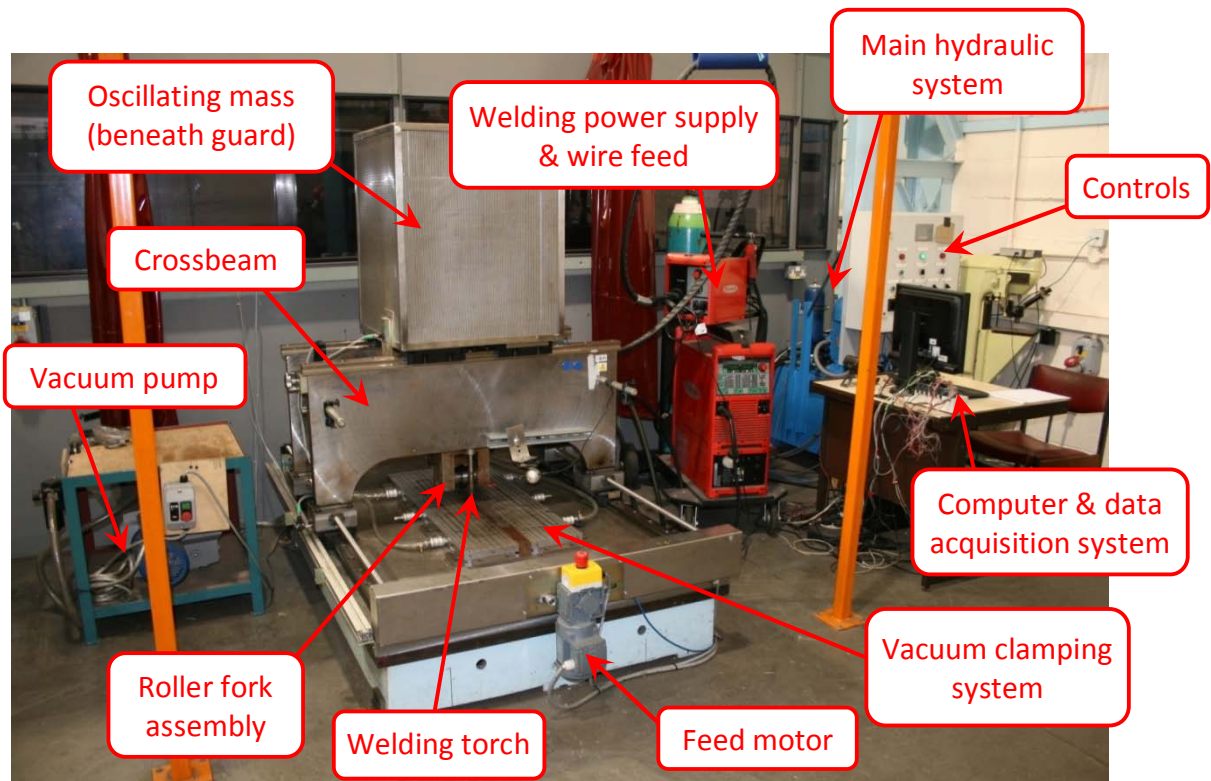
Overview of the rolling system. The hydraulic cylinder which actuates the roller fork is mounted vertically inside the crossbeam.
